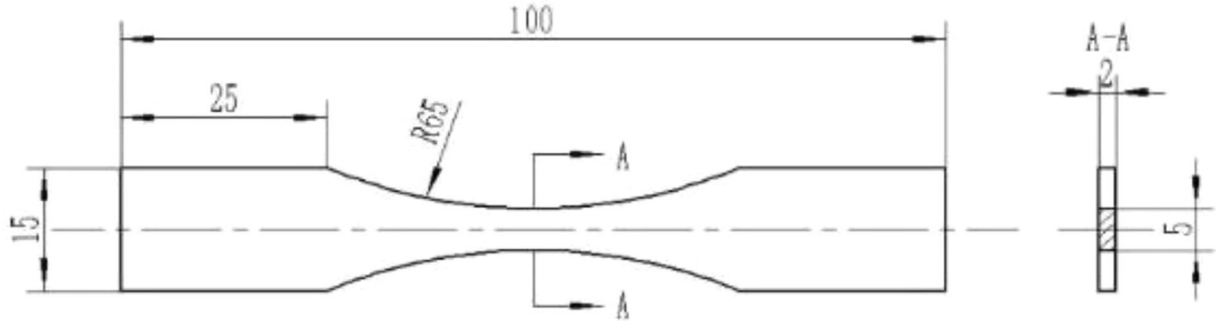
Materials specimens for the fatigue tests (Dimensions in mm)
